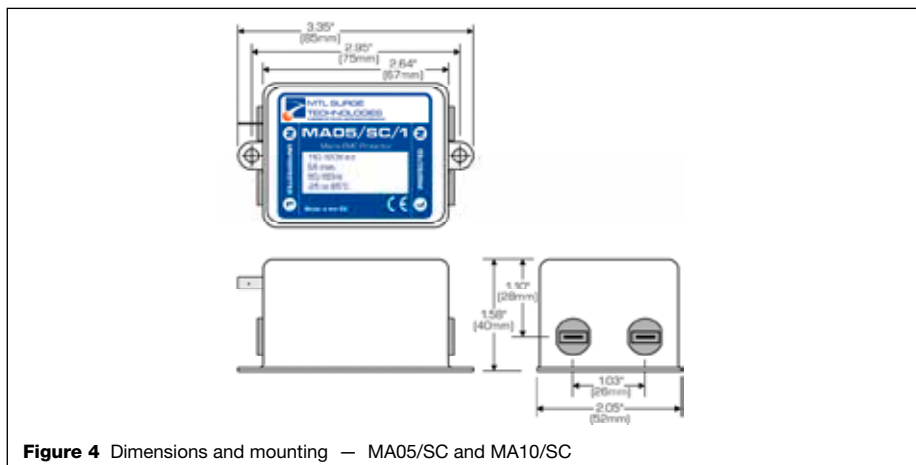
Dimensions and mounting — MA05/SC and MA10/SC
